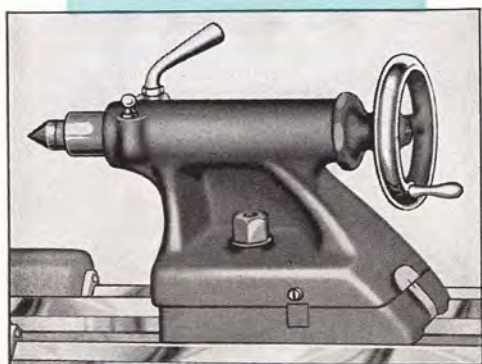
Improved Tailstock has long bearing on lathe bed and set-over for taper turning.
